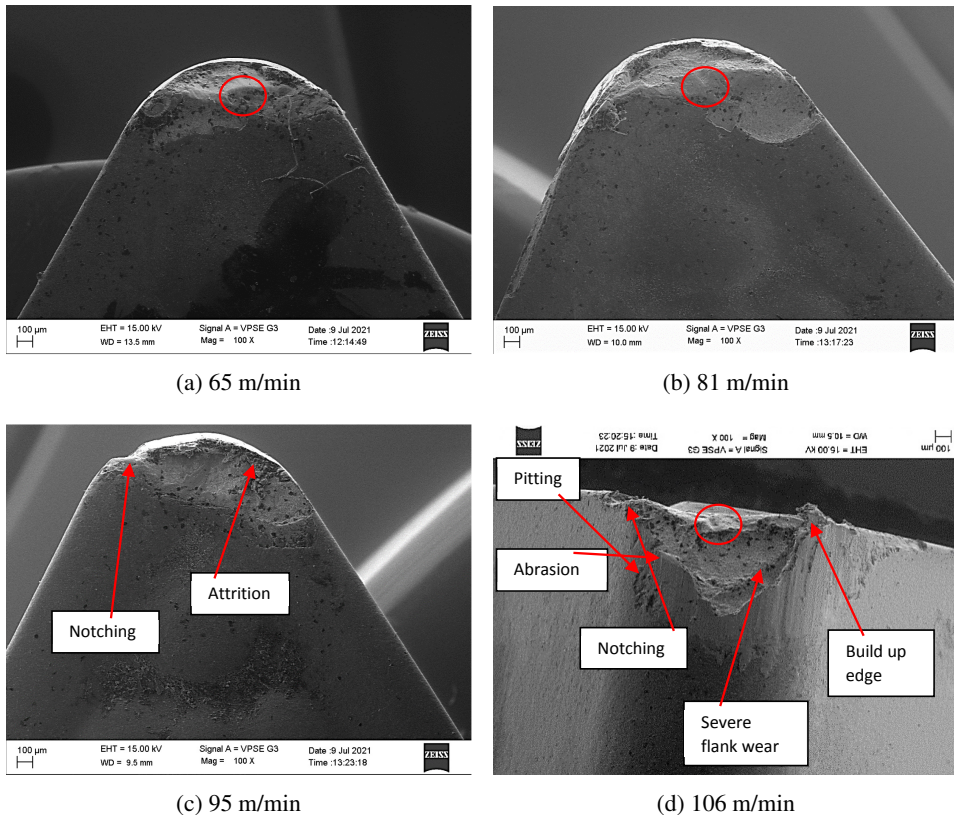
Tool wear during the increase in various cutting speeds for machining Inconel 718
